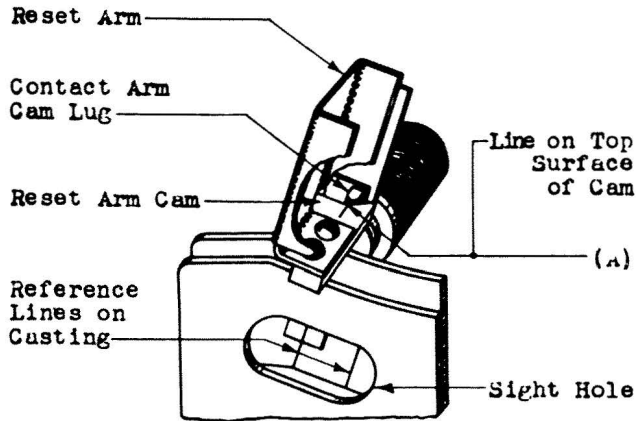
Method of Checking Relative Positions of Contact Arm Cam Lug and Reset Arm Cam
